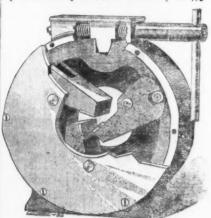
Enlarged Detail Through the Center, ing Chuck.
